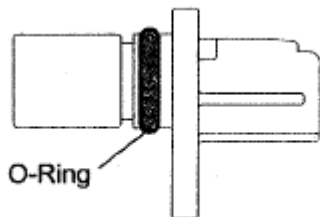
Identifying Camshaft Position Sensor O-Ring
